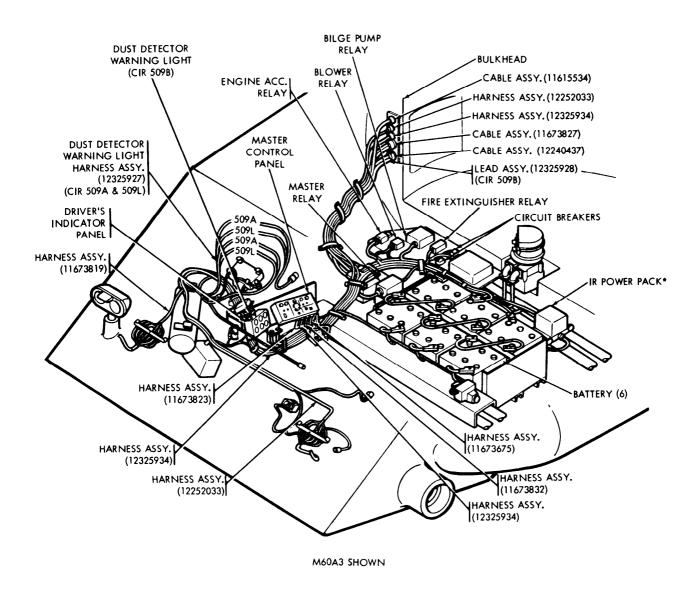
Crew compartment wiring harness and components - locational view (sheet 1 of 2).
